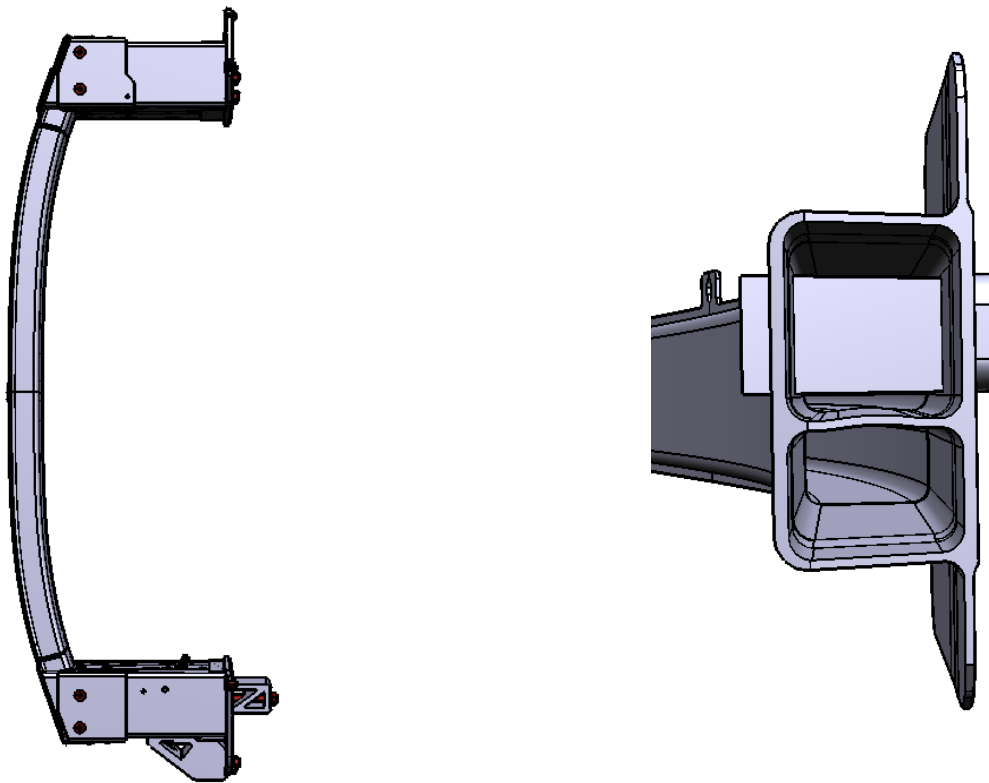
The profile of frontal beam (left) and the beam flange (right)
